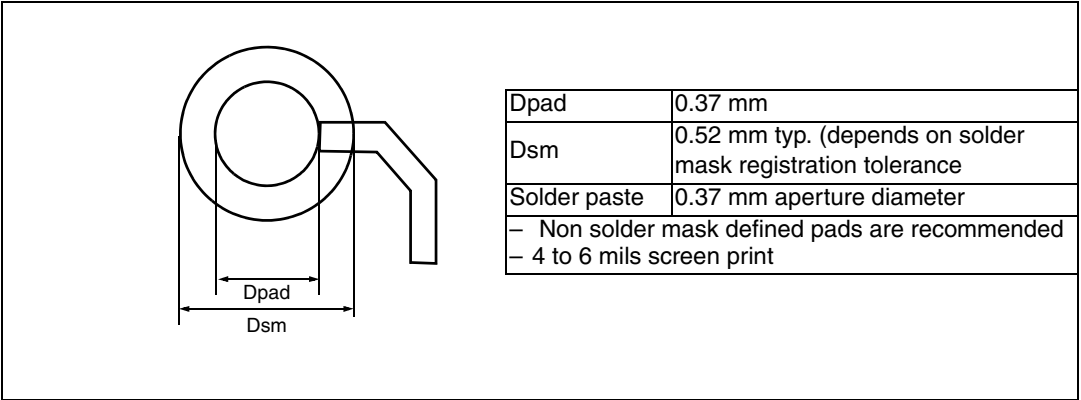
Recommended PCB design rules (0.80/0.75mm pitch BGA)
